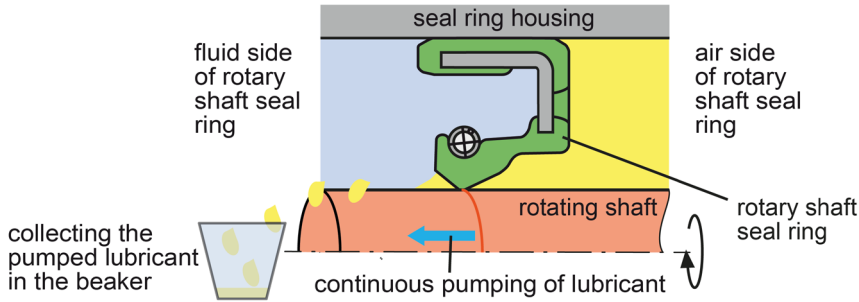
Pumping rate measurement with inversely mounted rotary shaft seal
